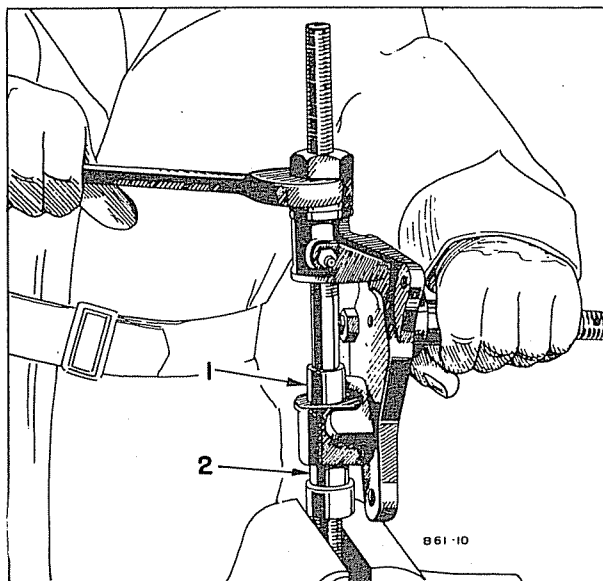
Removing King Pin Bushing (Reverse Elliott Type Axle).
